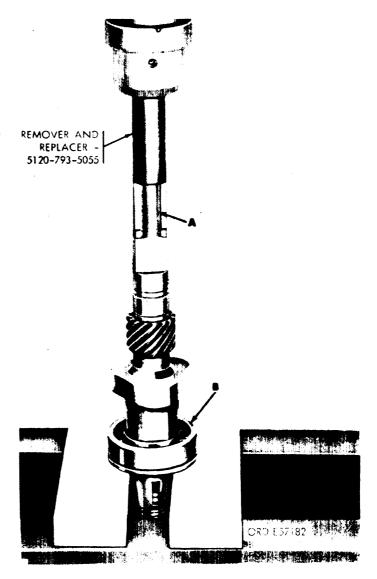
Installing camshaft ball bearing on camshaft using remover and replacer.
